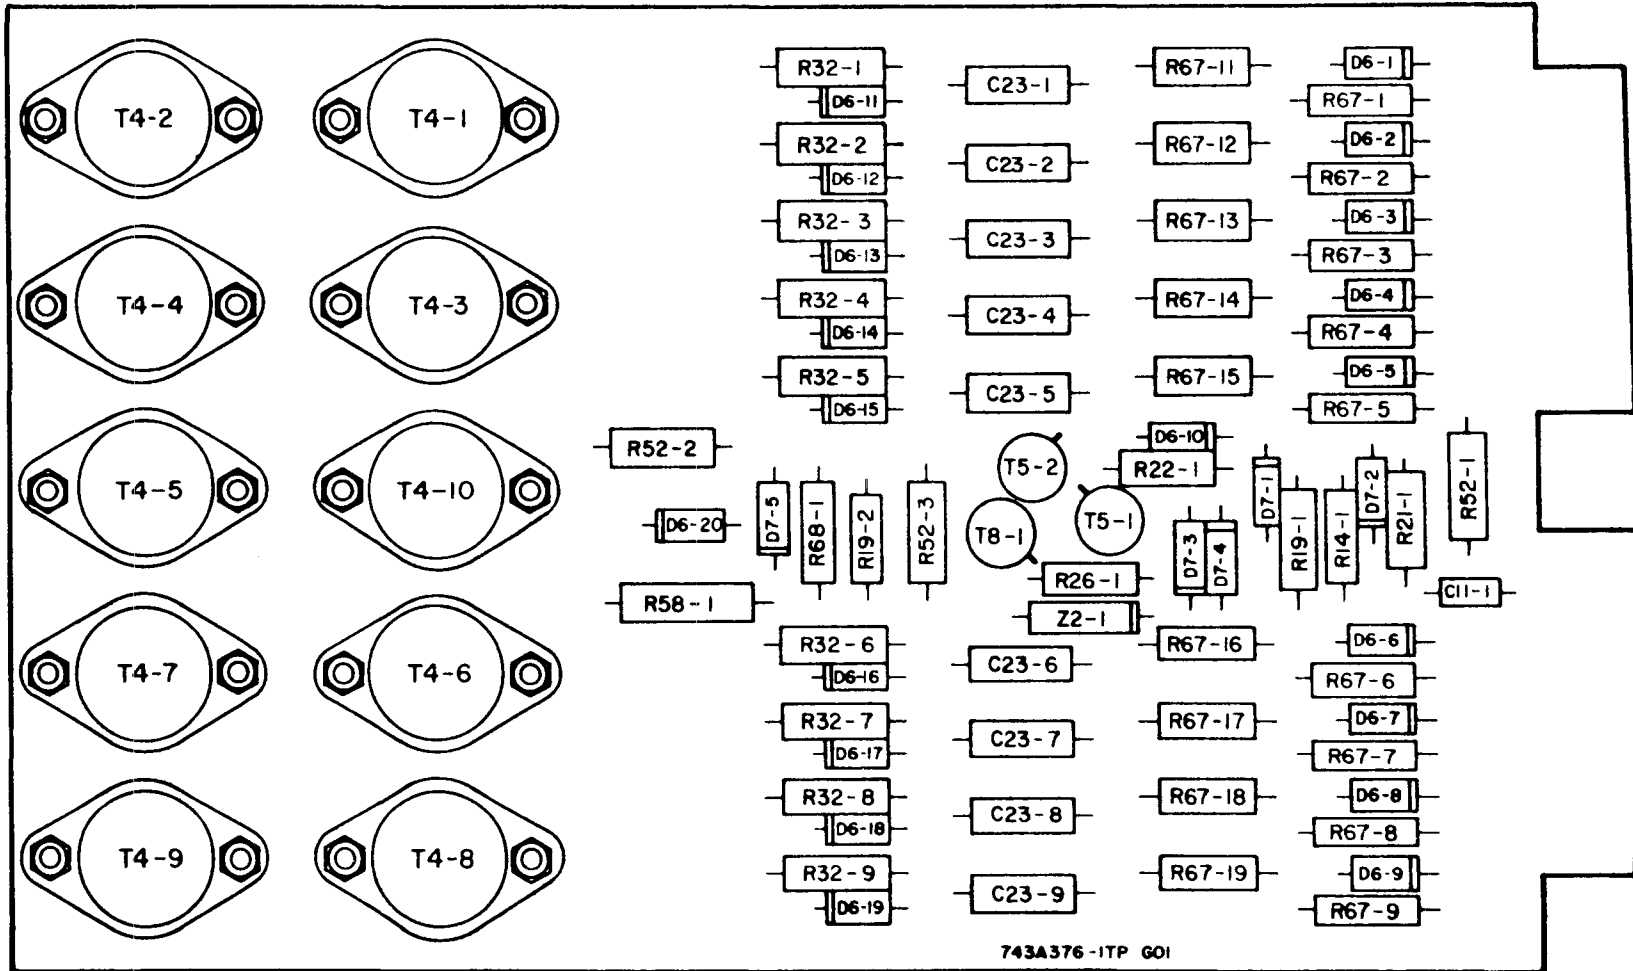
1TP1 ASSEMBLY (REF. DWG. 743A376, SUB 5)
